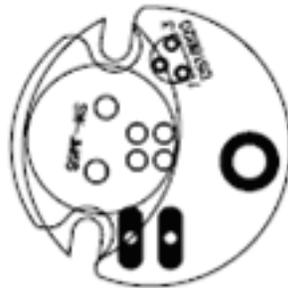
Absorber Heater Wire Board, Bottom View
